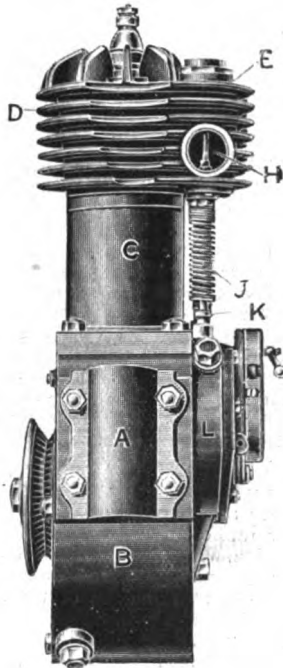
SIDE VIEW OF THE NEW MINERVA MOTOR.
